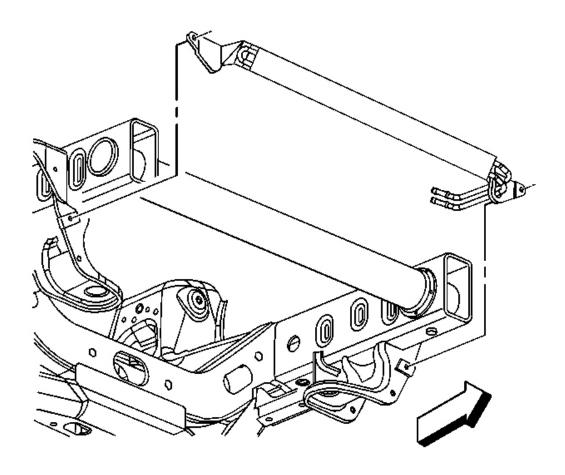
Removing/Installing Power Steering Cooler Courtesy of GENERAL MOTORS CORP.
